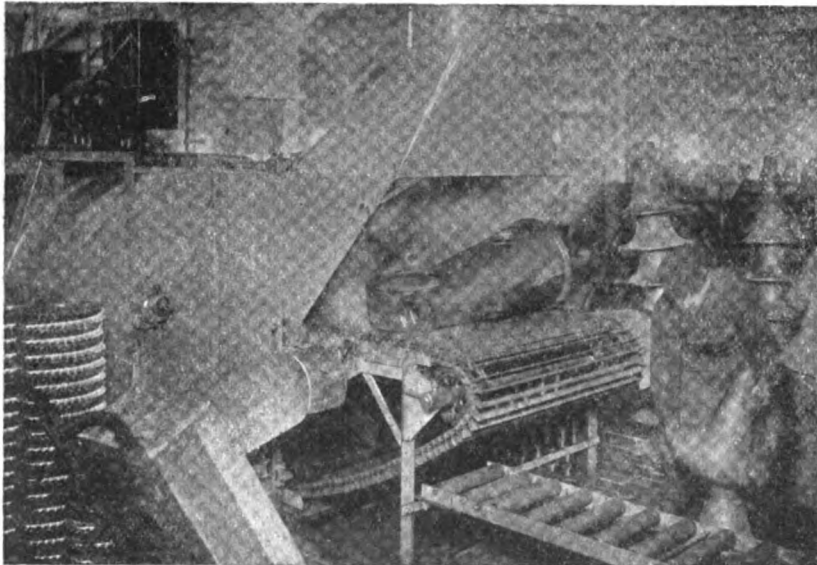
Beginning the assembly of the transmission and rear axle. The roller conveyor comes from the manufacturing department, and the first operation is that of washing
